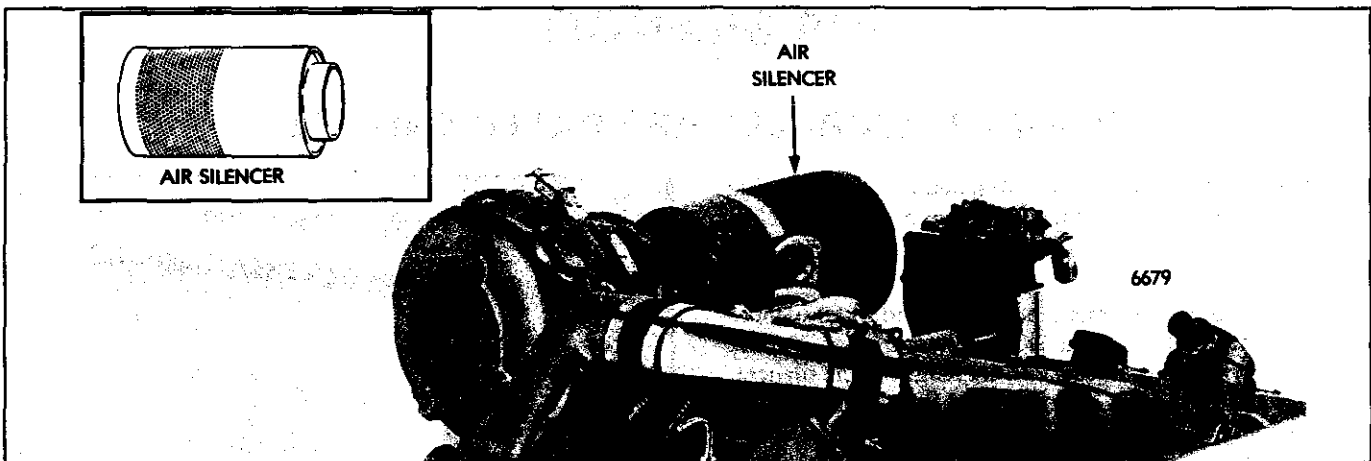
Air Silencer Mounted on 6V Turbocharged Engine
